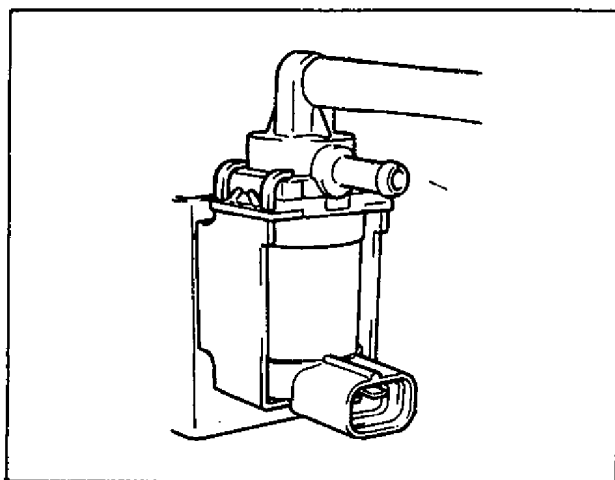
E-142 Checking ISC Solenoid Valve (1)
